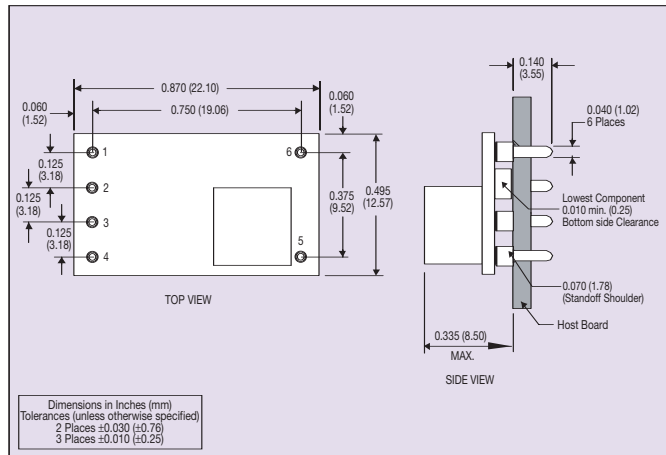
Plated Through-Hole Mechanical Drawing - Suffix H
